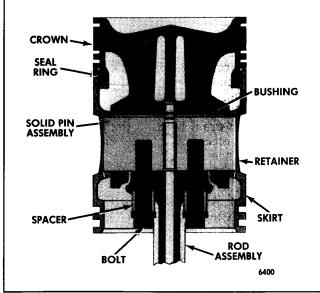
Cross-Head Piston and Connecting Rod Assembly
